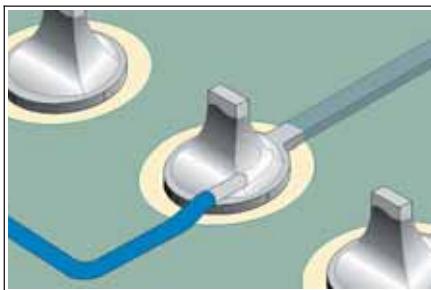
Acceptable Wire soldered into plated-through hole, component side. \
